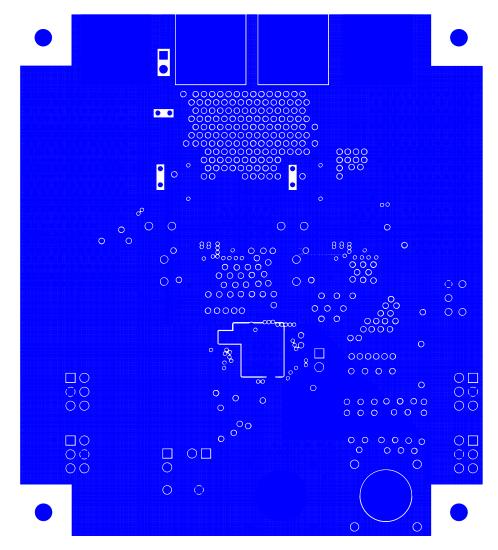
PCB - INNER LAYER 1 (TOP VIEW)
